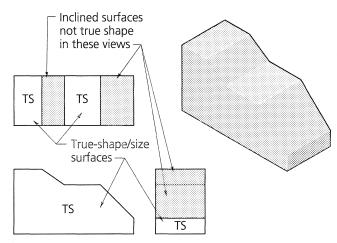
Inclined Surfaces and True-Shape Surfaces
